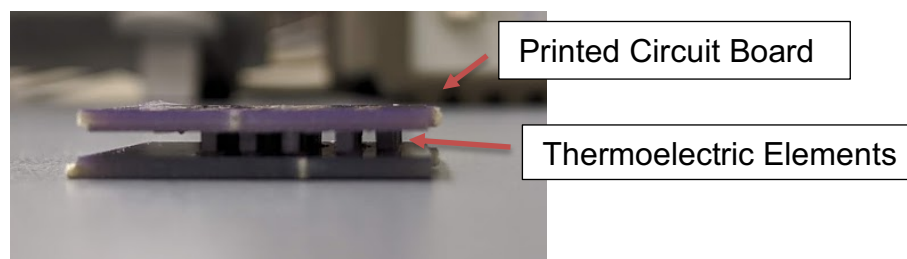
Assembled PCB Sandwich Thermoelectric Generator
